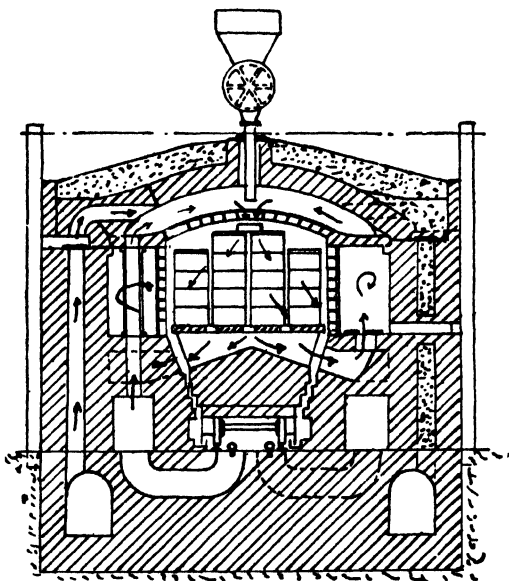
Section of "Willamson" Tunnel Kiln for Salt-glazing.
